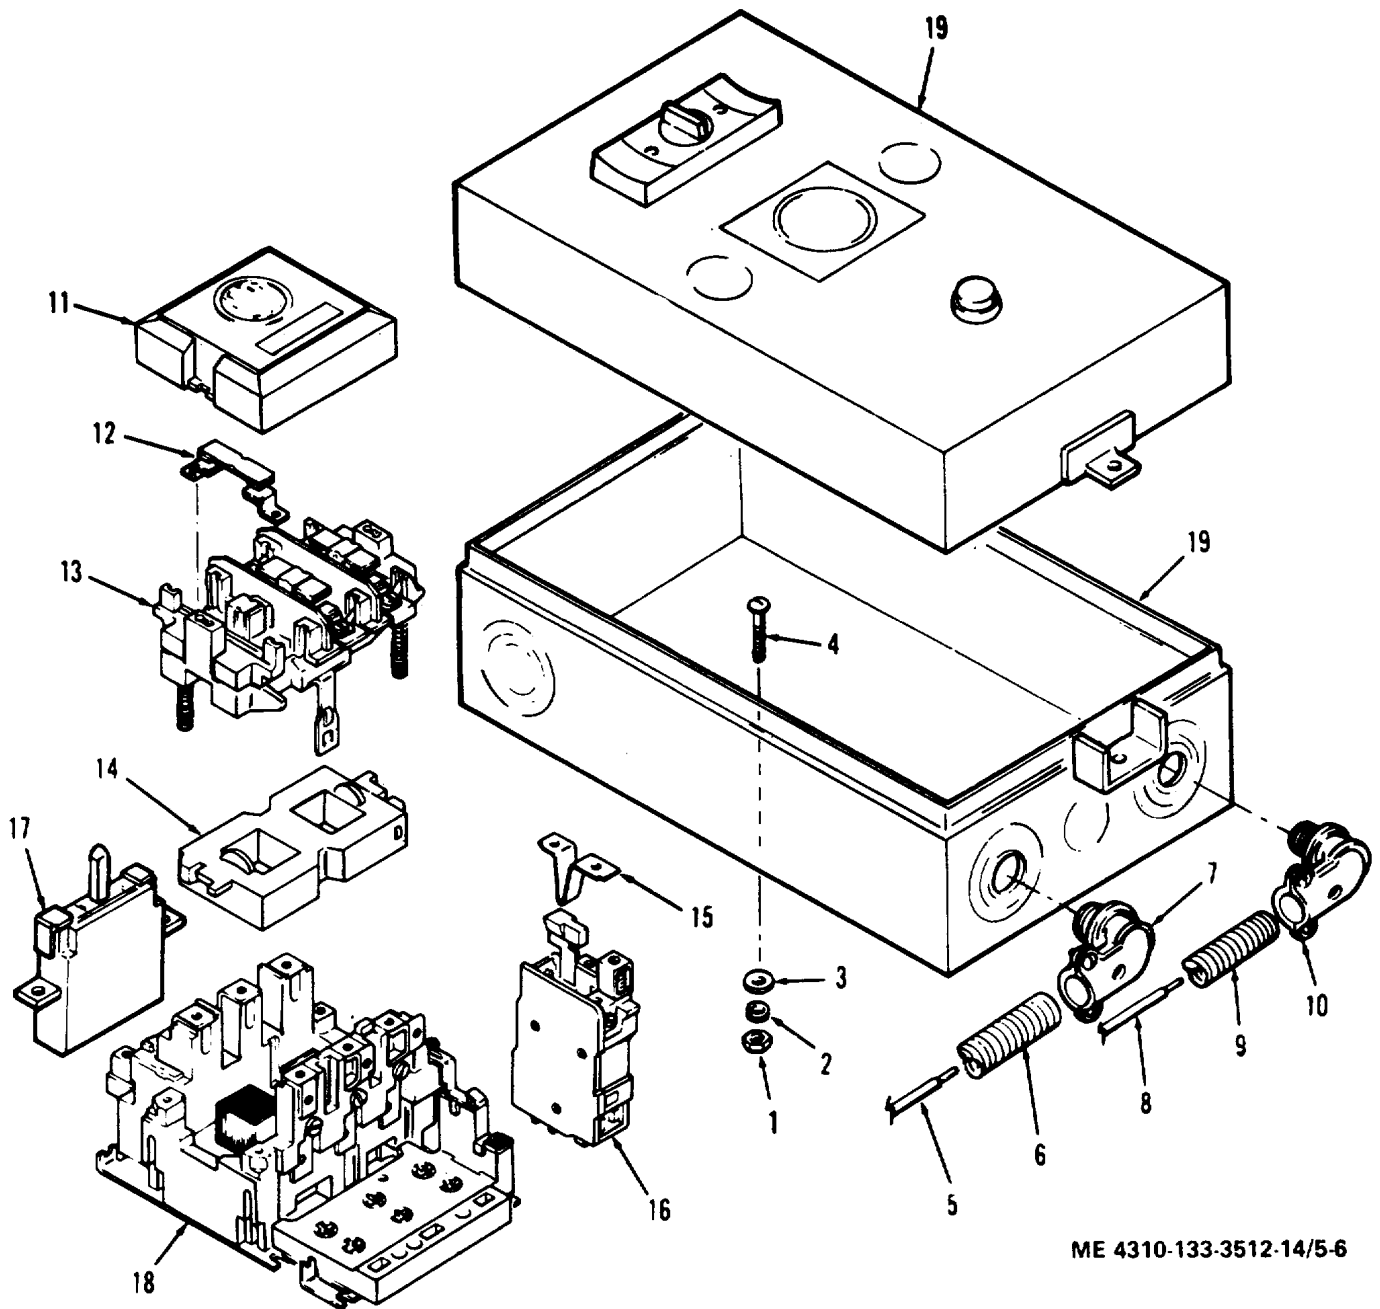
C&H magnetic starter removal (shown with cover removed)
